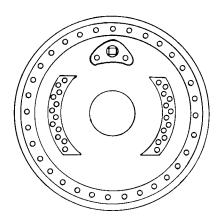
$1500 \& 1600 \mod el$  brake backing plates drilled  $\frac{3}{8}$ " to allow additional cooling.
